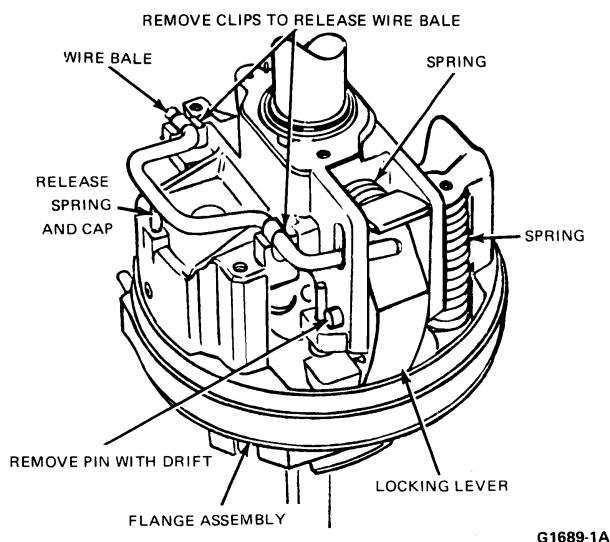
Removing Wire Bale and Tilt Locking Lever
